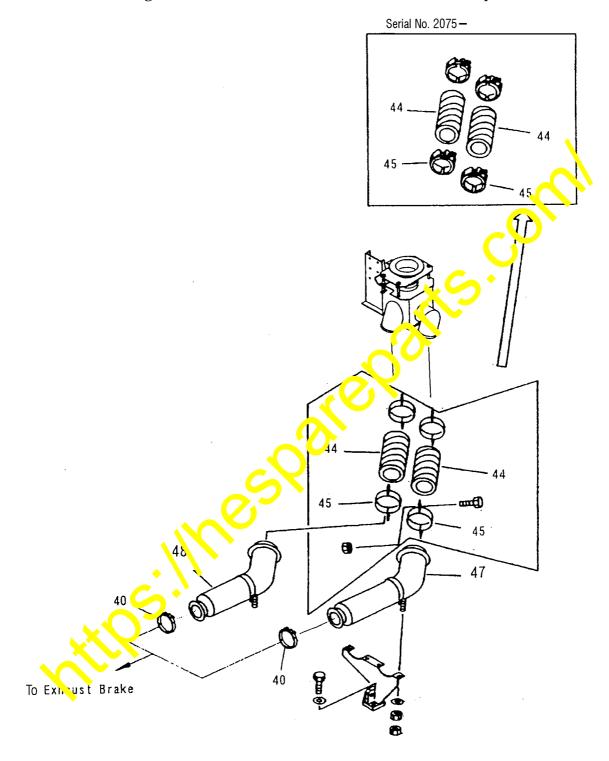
Drawing for removal of the piping parts (Exhaust piping: Exhaust switch box spec.)
